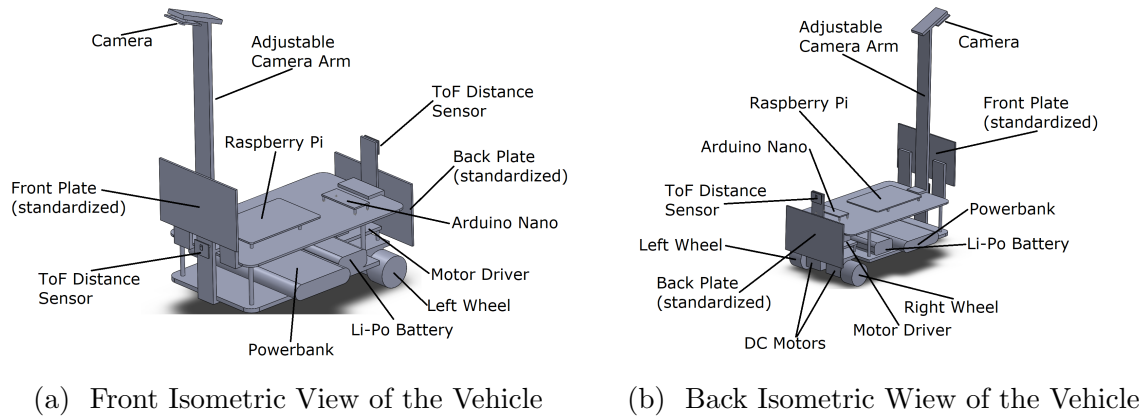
Front & Back Isometric View of the 3D Drawing of the Vehicle
